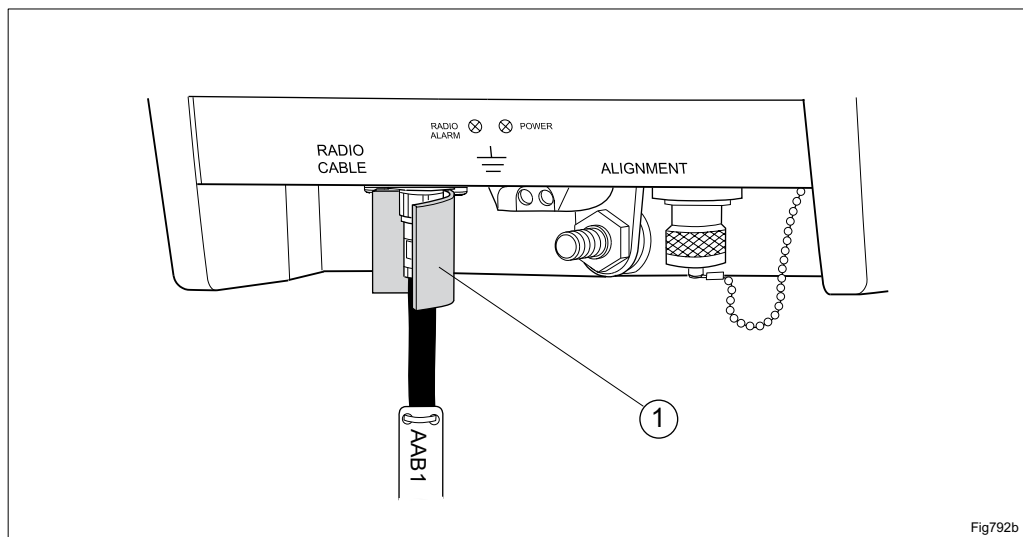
Connecting the radio cable to RAU2, RAU1 is similar.
